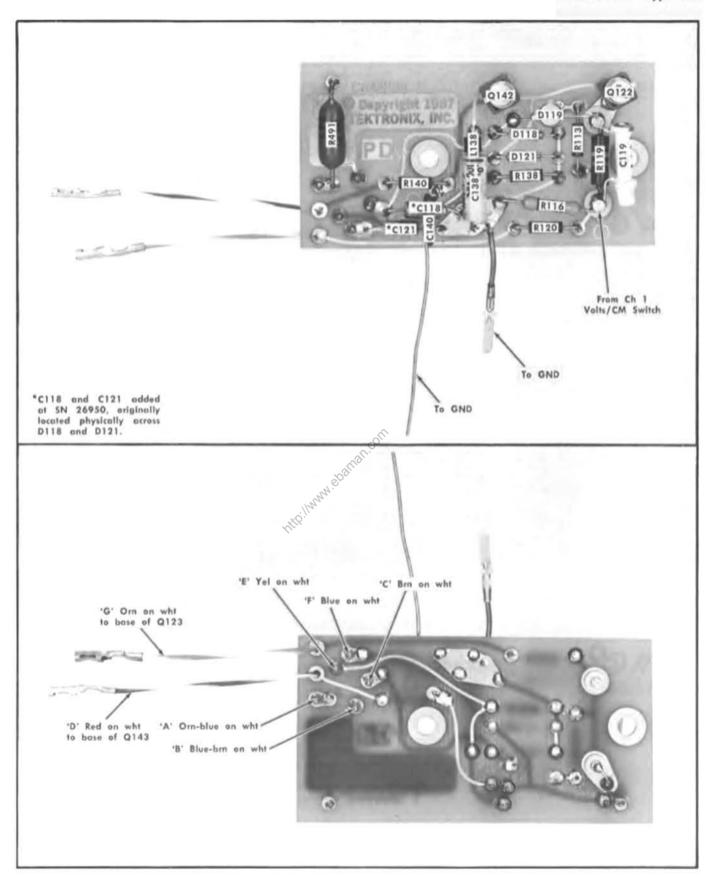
Channel 1 Input FET board, Front and back view showing parts location and lead connections.
